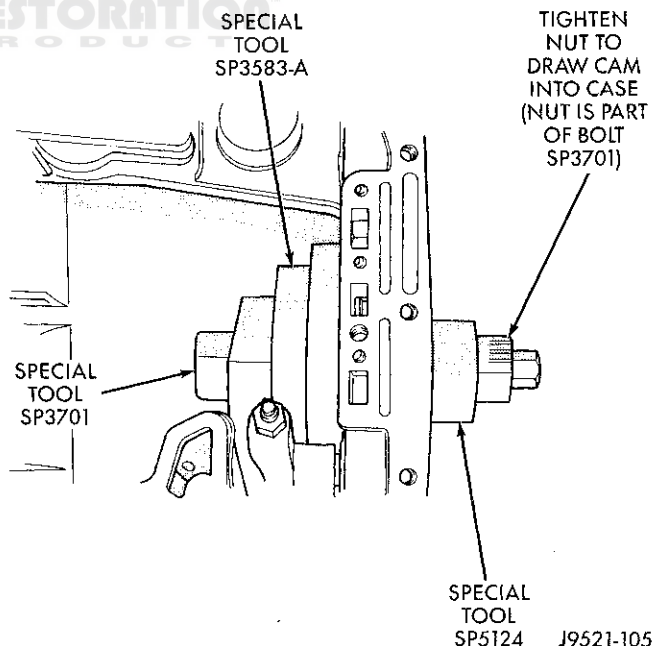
Pressing Overrunning Clutch Cam Into Case
